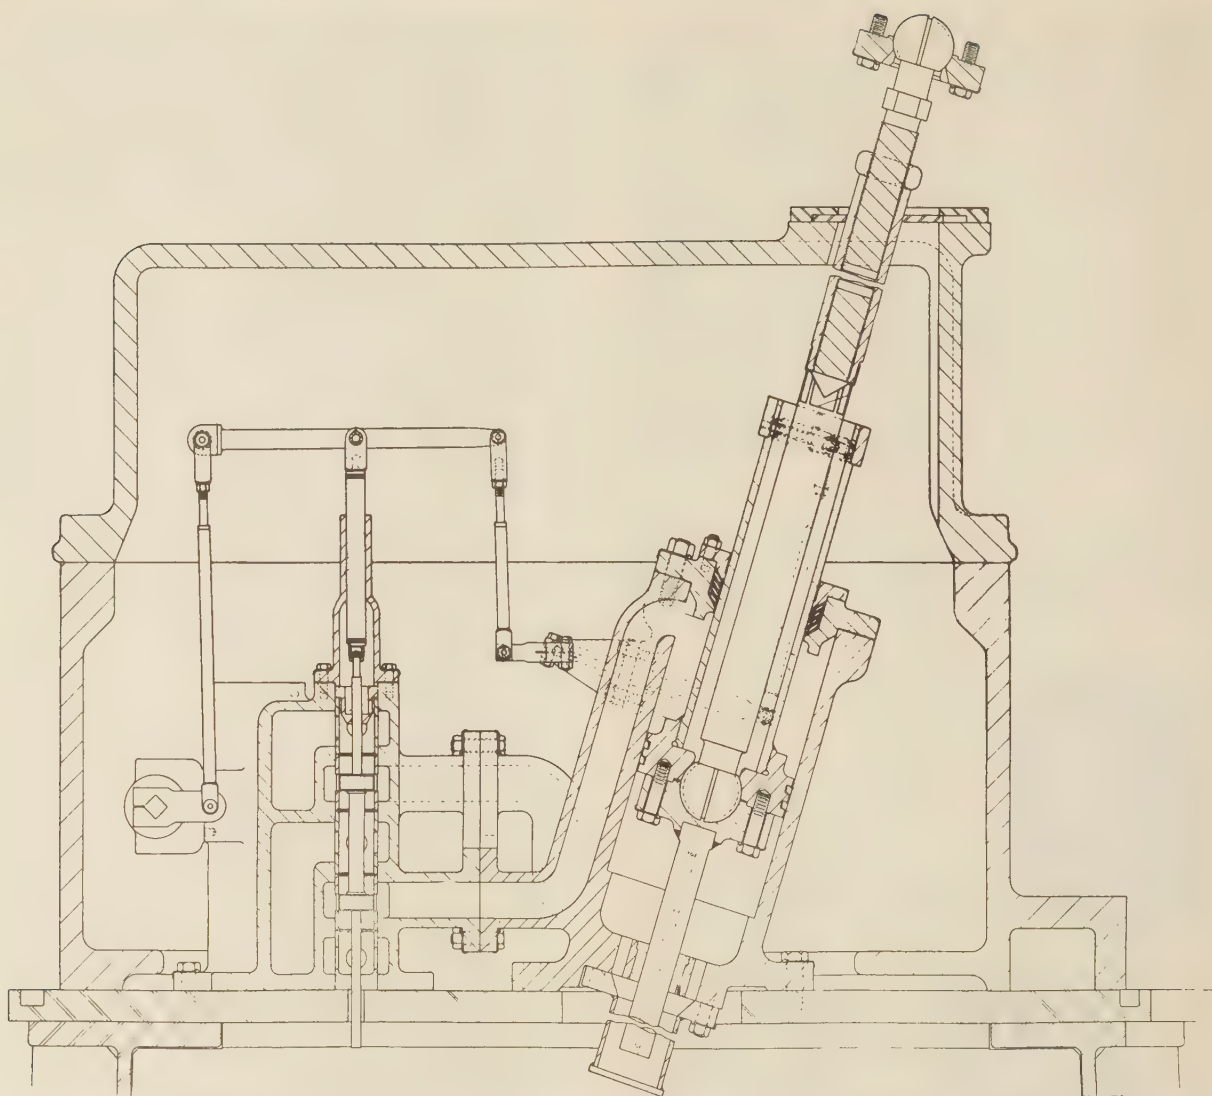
TYPICAL HYDRAULIC MECHANISM SHOWING TWO-DIAMETER OPERATING PISTON TO SECURE QUICK VALVE CLOSING, ALSO COMPLETE ENCLOSURE OF PARTS CARRYING HIGH-PRESSURE OIL TO REDUCE FIRE HAZARD
